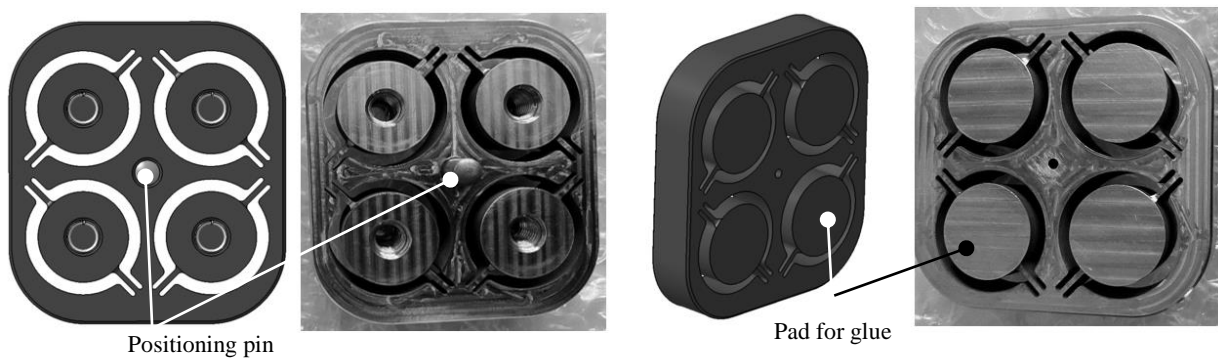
Detailed design of the camera prototype bipods and of several detector assembly parts
